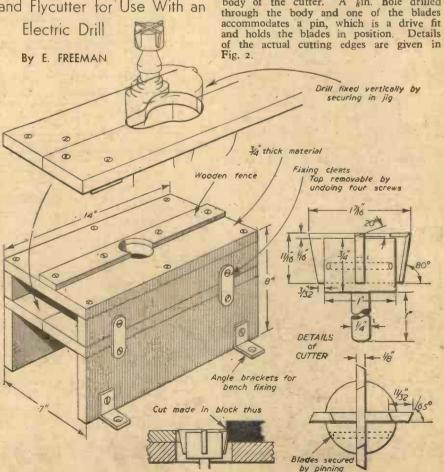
Details and dimensions of the wooden jig and flycutter.
